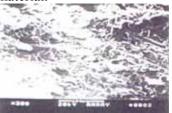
Micrographic Photograph of the Fracture Section of ZW-1 Worm Gear
